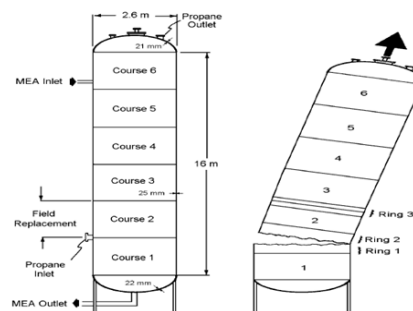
Initial and Final of Pressure vessel fracture mechanics analysis.
